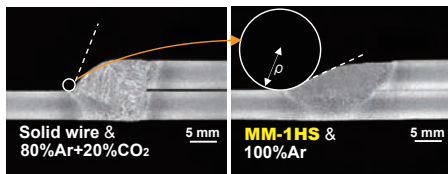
MX-MIG with MM-1HS offers a larger flank angle weld toe as compared with conventional solid wire MAG.
